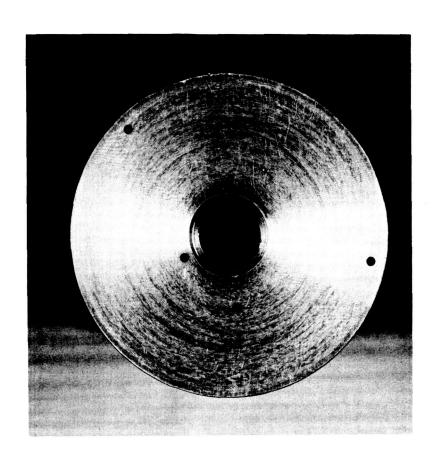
Photograph Showing End View of 50 KW Test Condenser Nickel Tube with Drilled Thermocouple Holes (C-64081220)
